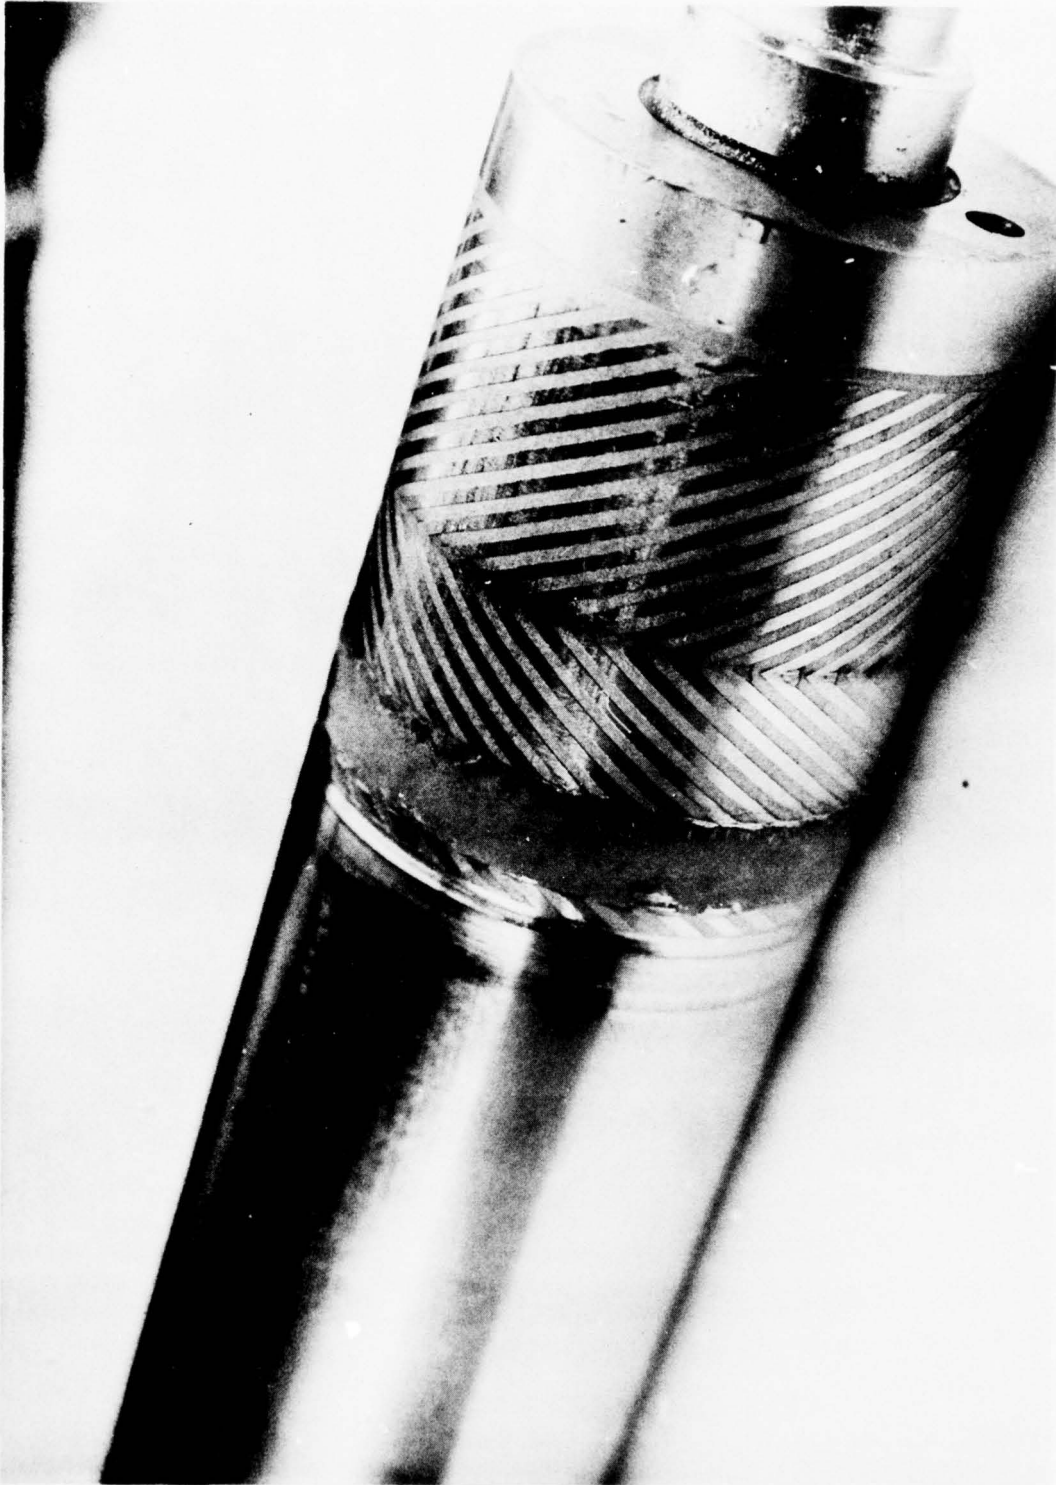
Herringbone Journal Bearing Failure Due to Foreign Material Entering Bearing
